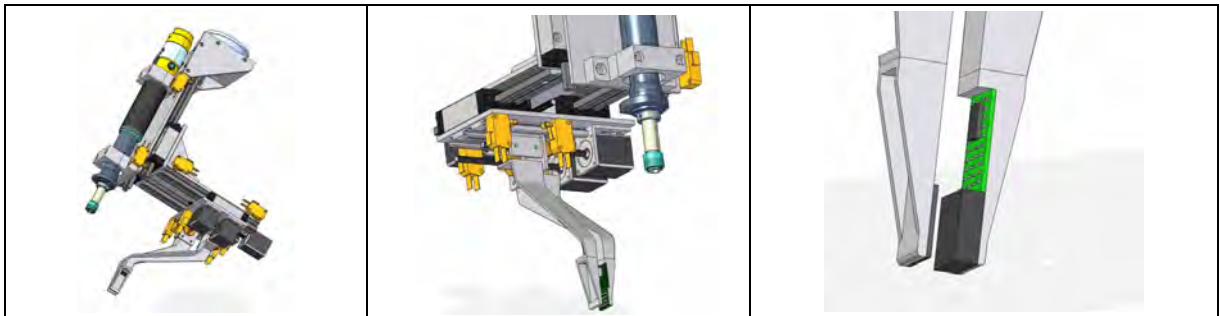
The WIRES end effector with integrated screwdriver and wrist force/torque sensor and detailed view of the tactile sensor.
